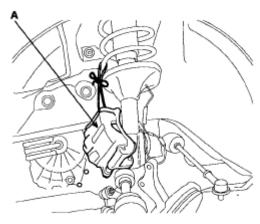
Identifying ABS Wheel Speed Sensor Courtesy of HYUNDAI MOTOR CO.
